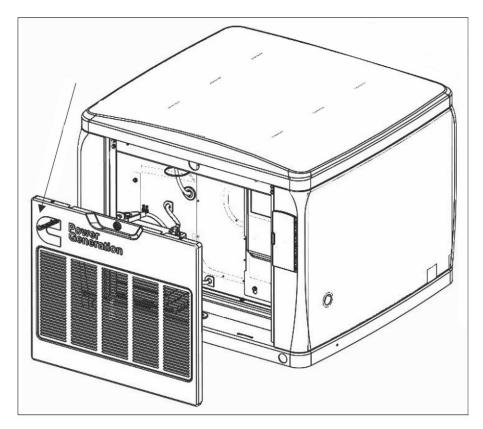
AIR INLET ACCESS PANEL LOCATION (GENERATOR SETS THAT REQUIRE HOLE DRILLING ONLY)
